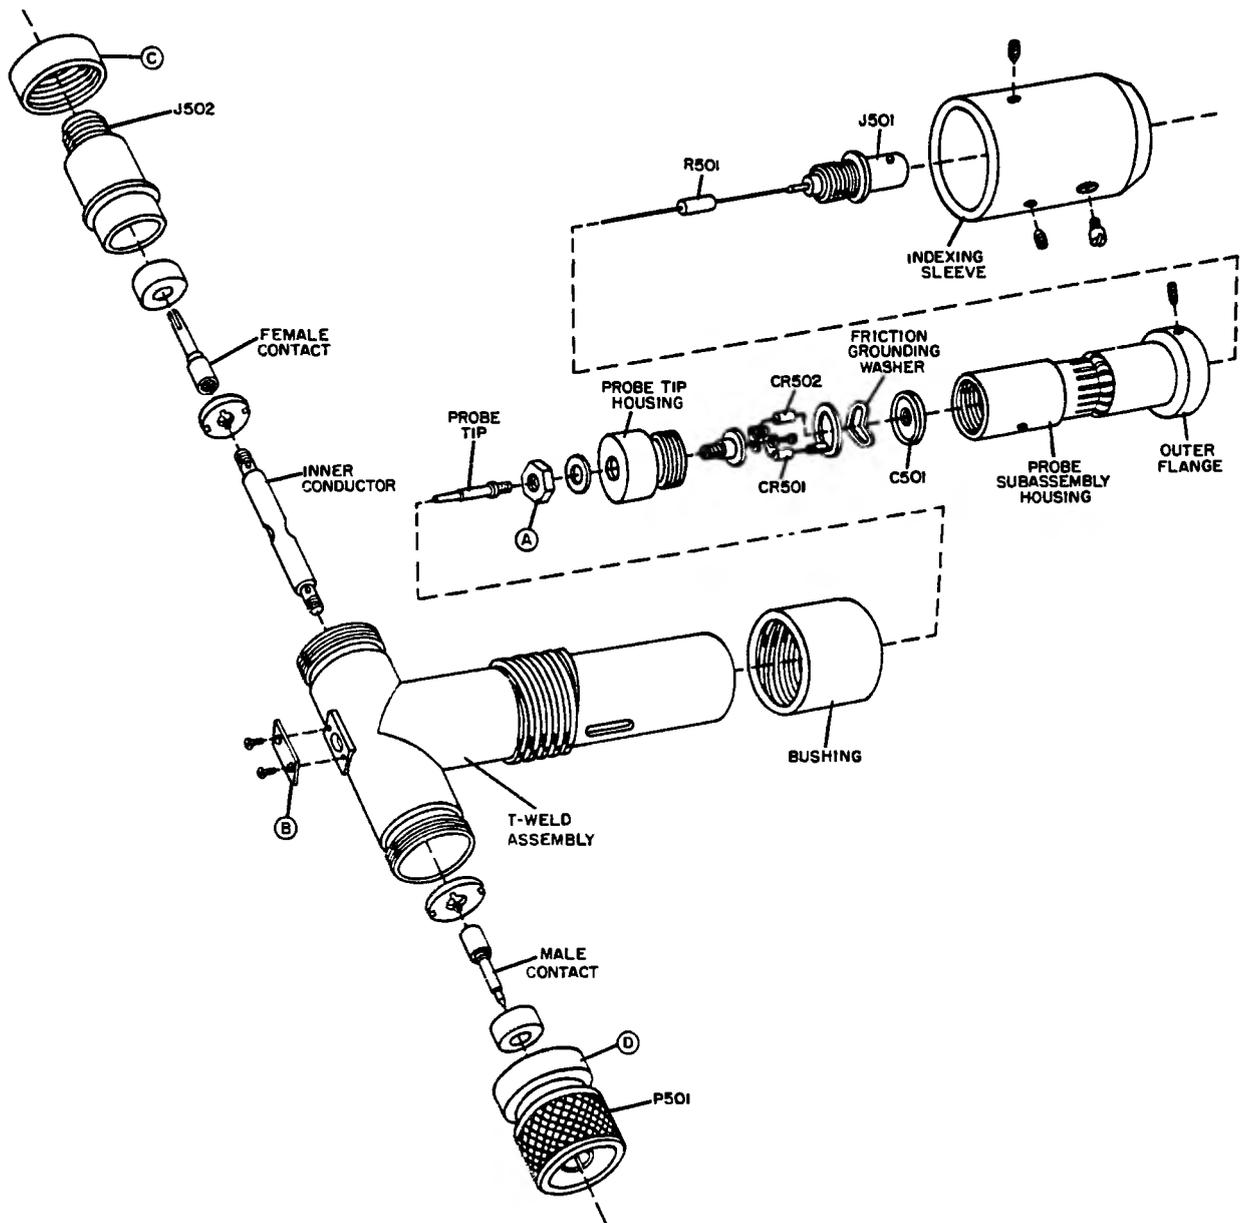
RF Coupler-Detector CU-413/TRM-1, Exploded View
